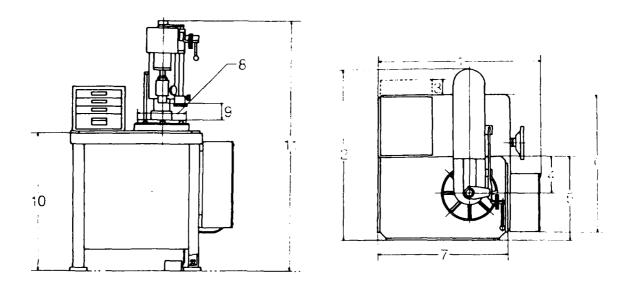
Tokiwa Seiki Polishing Machine Dimensions 110
